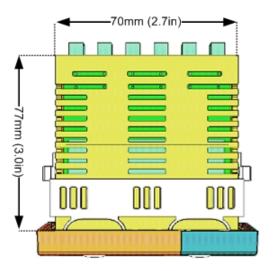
FX06 Controller and Panel Cut-Out Dimensions
